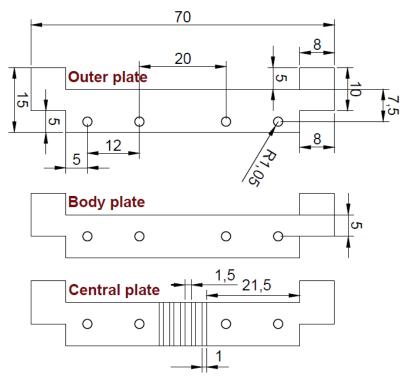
Drafts of the collimator plates. Outer plates have shifted mounting holes. It provides precise assembling of the blocks
